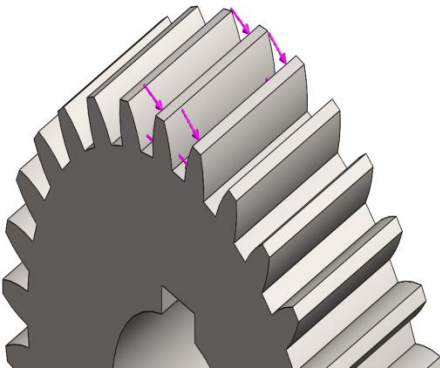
Shows force applied normal at the contact surfaces of the spur gear
